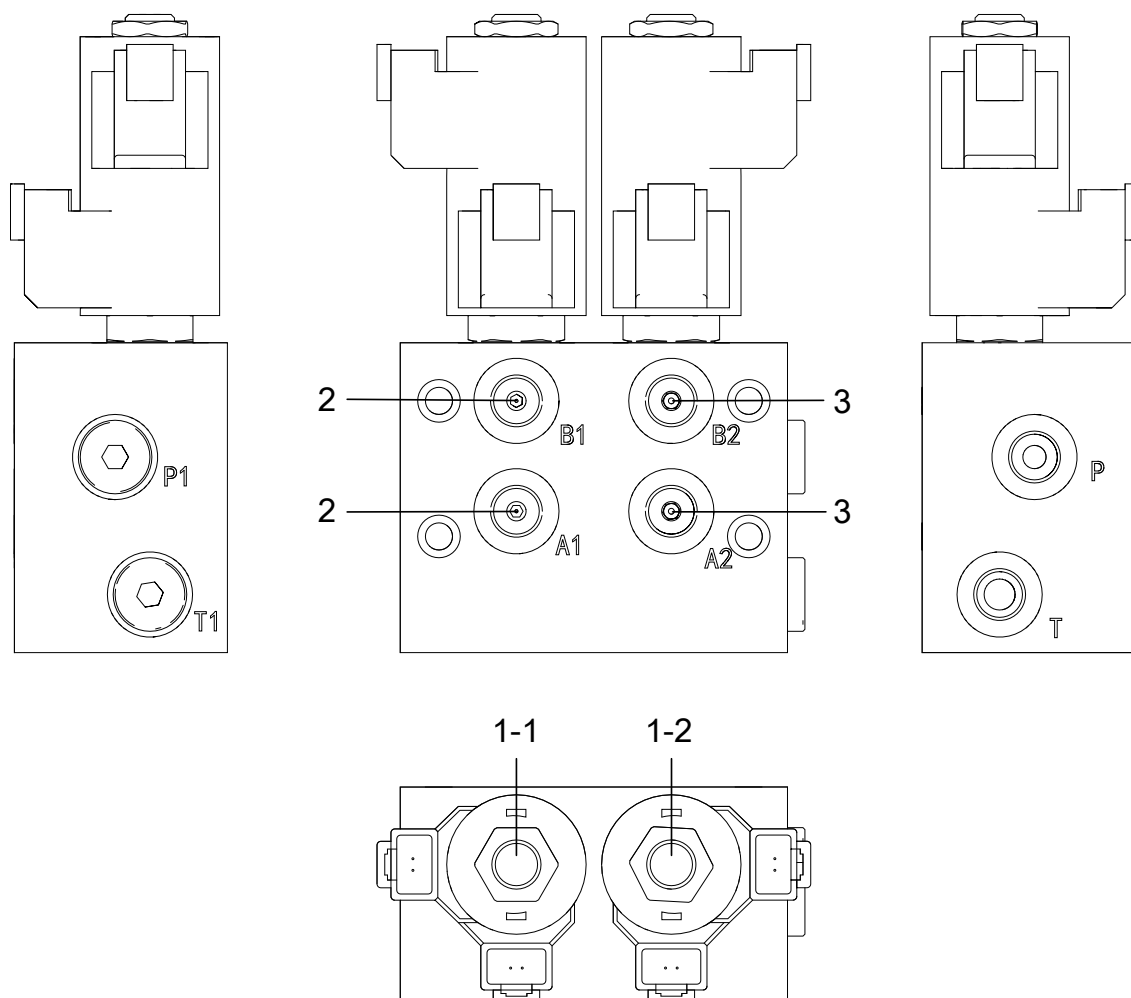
Platform Duplex Valve Manifold (PN.202040003259)
